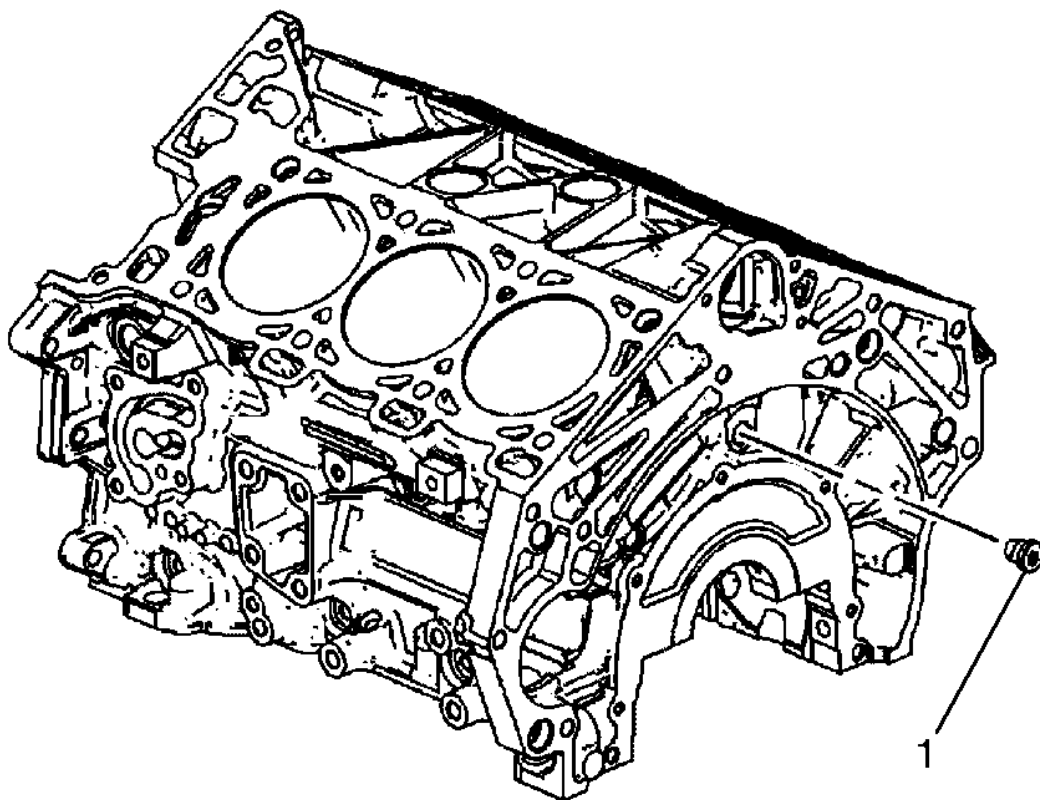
Identifying M14 Right Side Oil Gallery Threaded Plug
